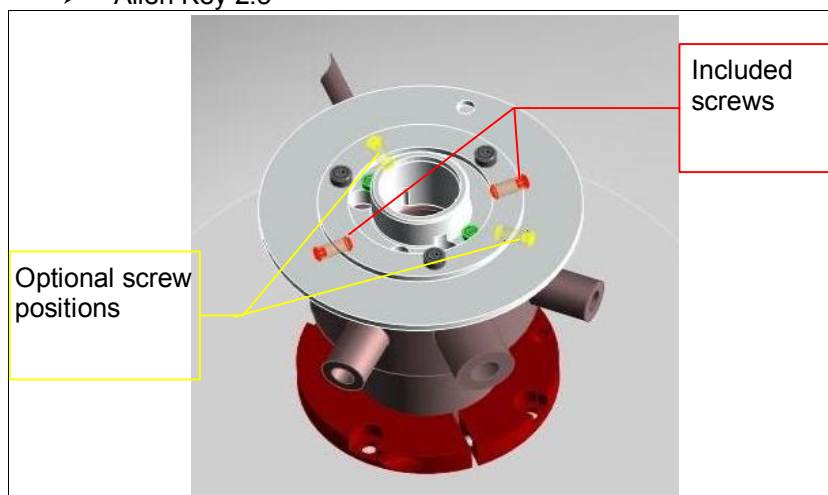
Installed LINEAR AXIS MOUNTING UNIT BST SIDE.
